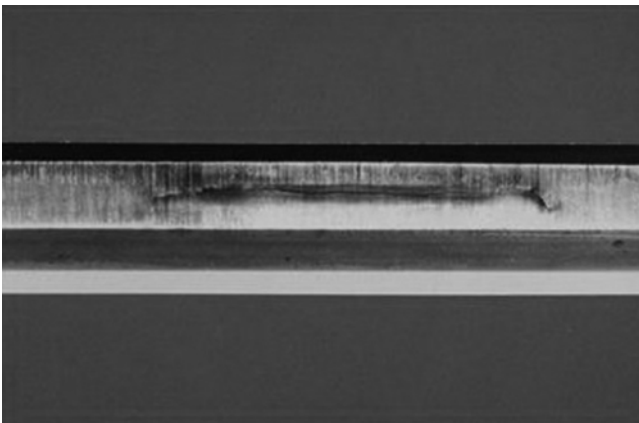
Tube-to-Tube Fretting Wear in a Power Plant Condenser.
